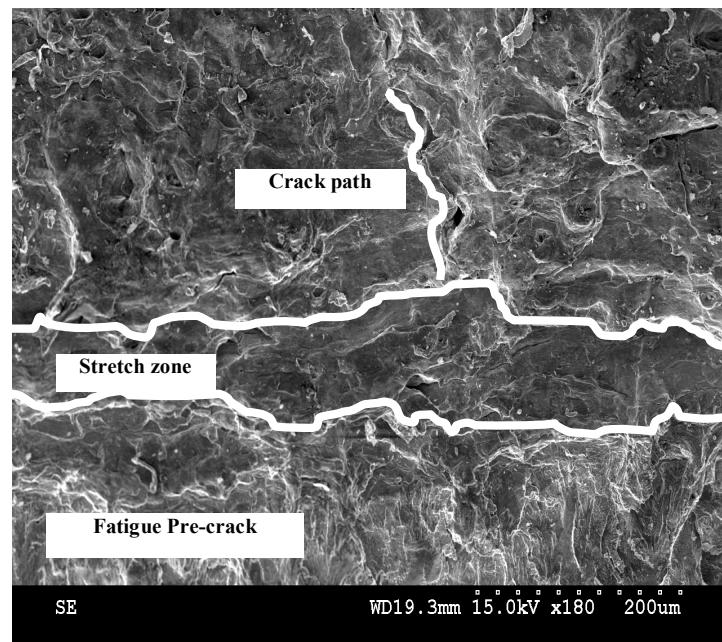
Fracture surface observed after interrupted test of a typical cyclic fracture test specimen
